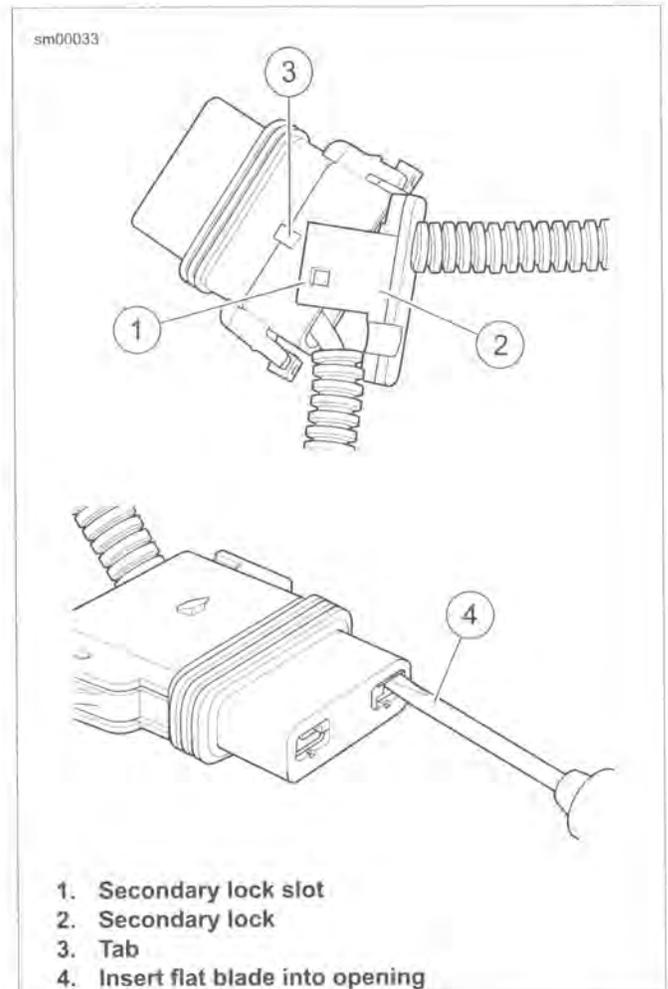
Delphi 800 Metri-Pack Sealed Main Fuse Housing: Remove Socket Terminals
